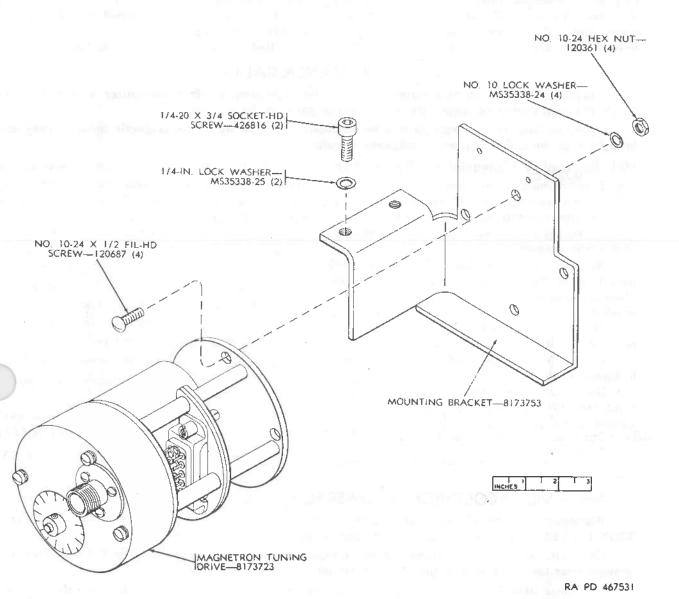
Magnetron tuning drive and mounting bracket-partially exploded view.
